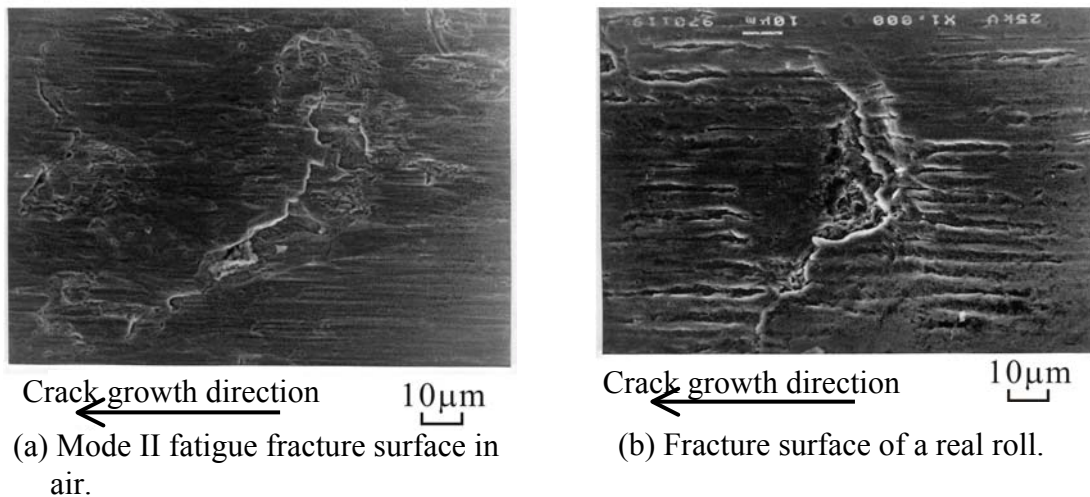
Mode II fatigue fracture surface of a roll steel, SKD6.
